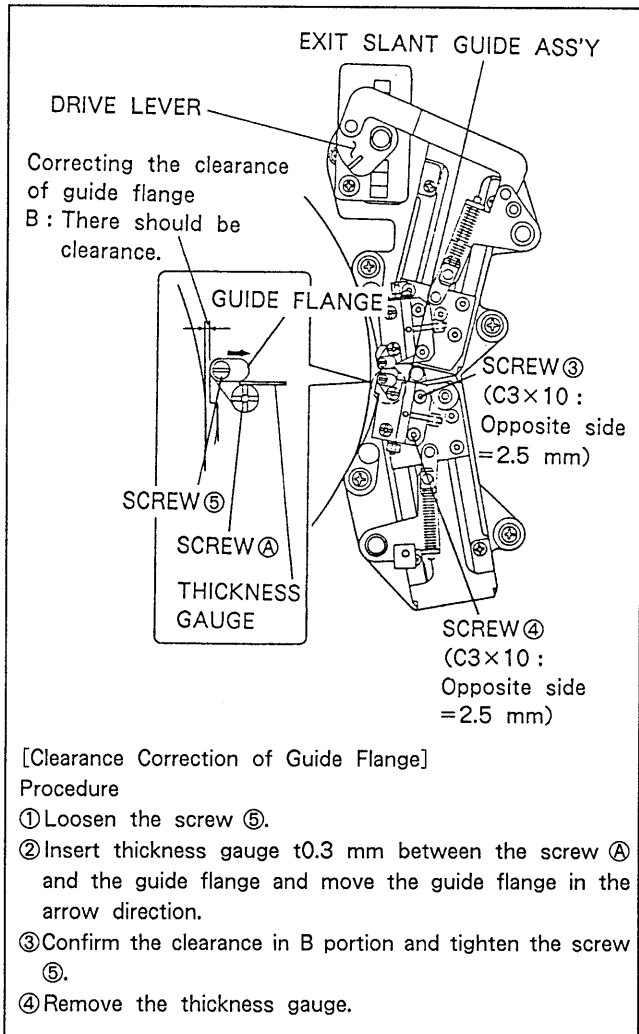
Confirmation of Exit Slant Guide Ass'y Installation
